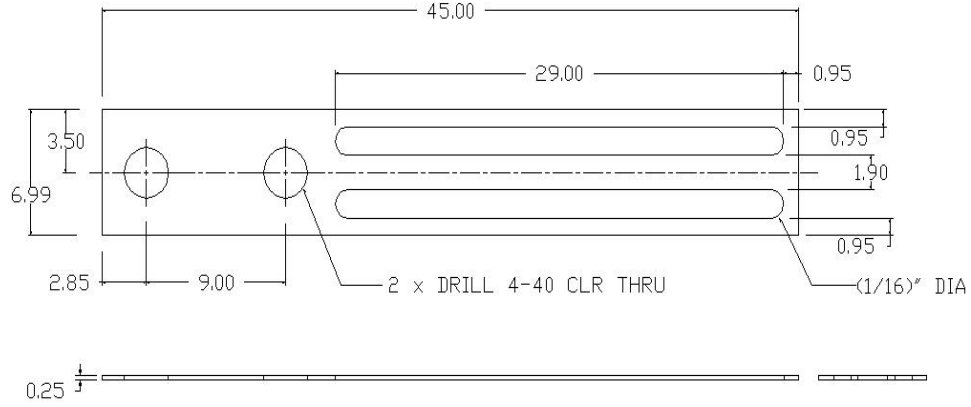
Monolithic prototype actuator dimensions. All dimensions are in millimetres.
